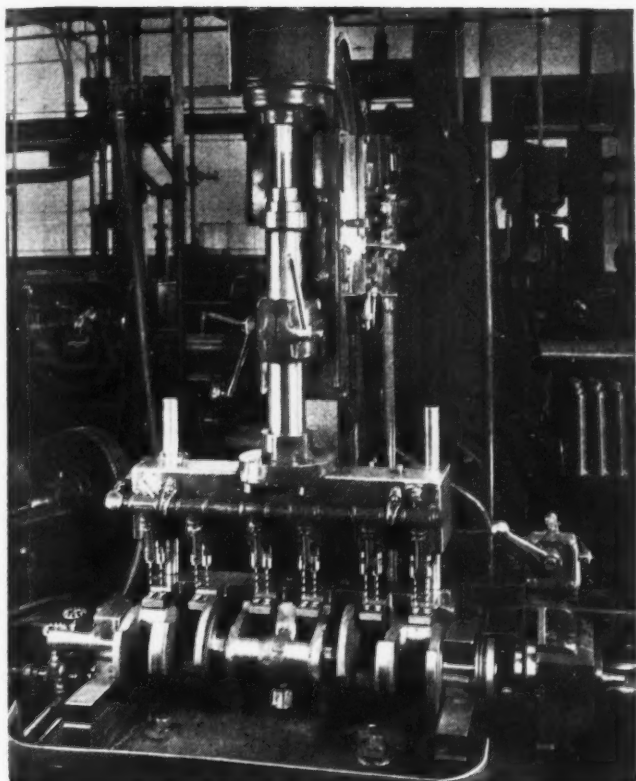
Machine Arranged for Hydraulic Step-by-step Drilling of Twelve Oil-holes in Lincoln-Zephyr Crankshafts
